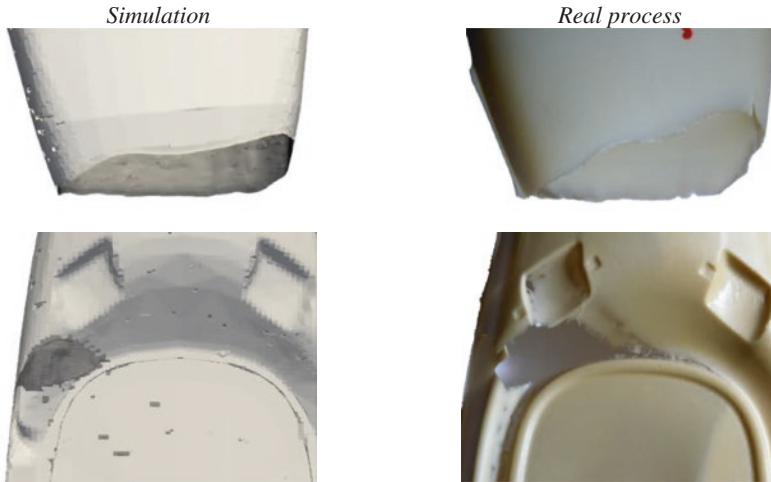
Typical defects of roto-moulded components due to incorrect machine movements [20]
